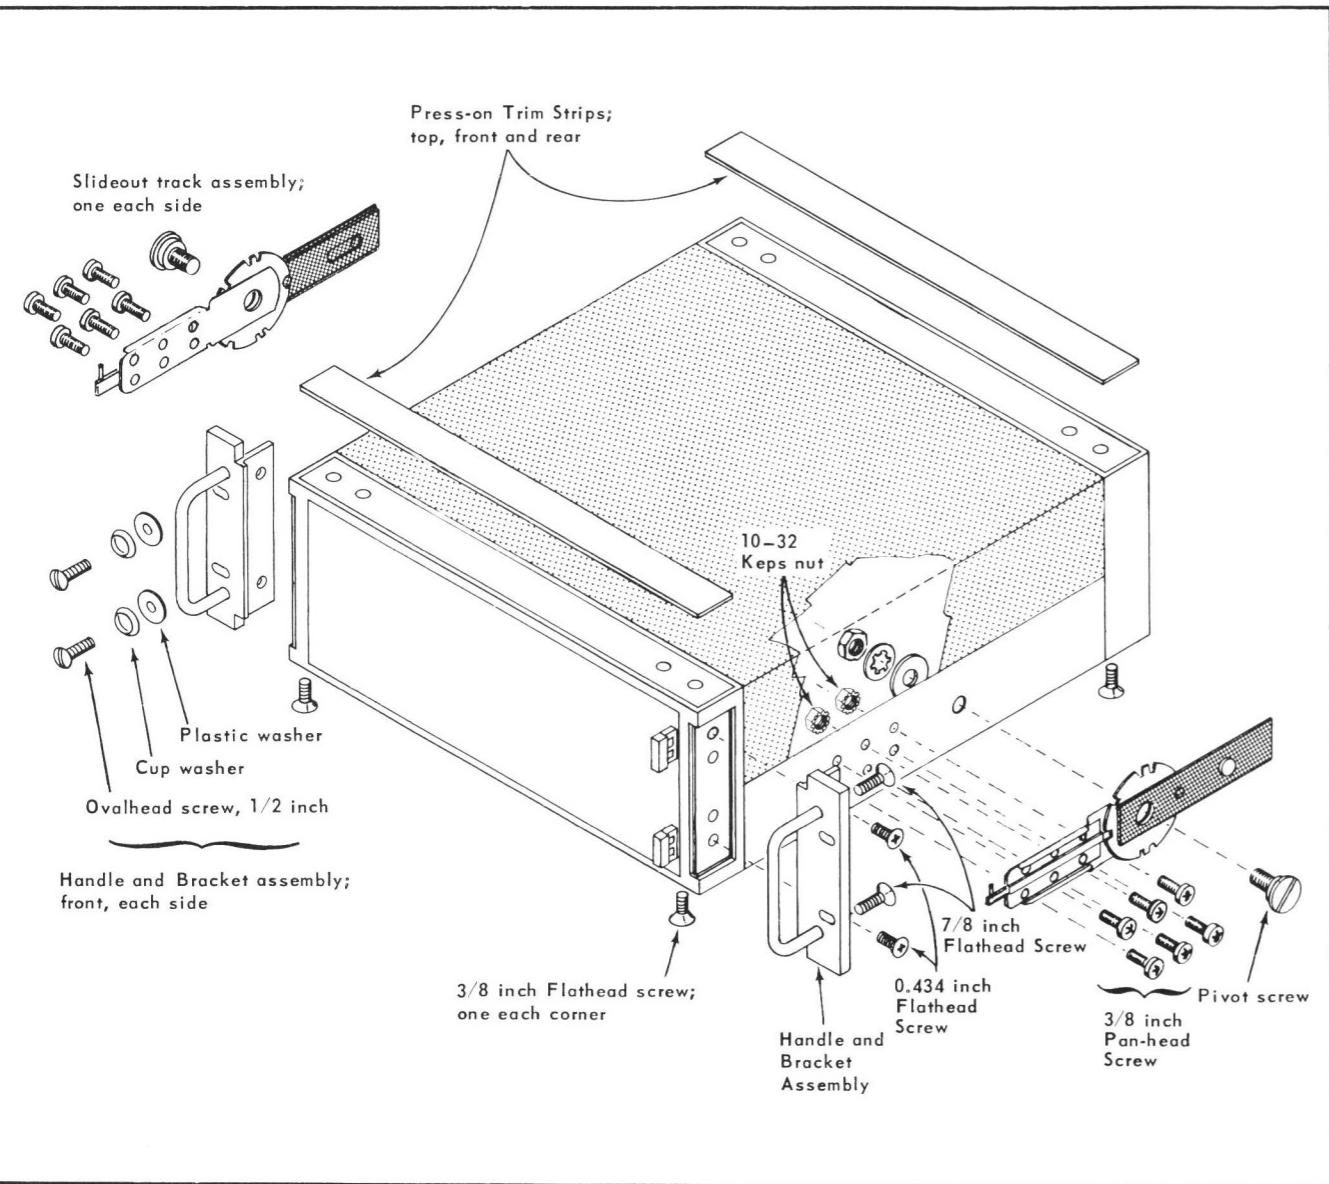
Parts peculiar to the Type R250 chassis. See Figs. 8-4, 8-5, and 8-10 for rack attachment parts.
